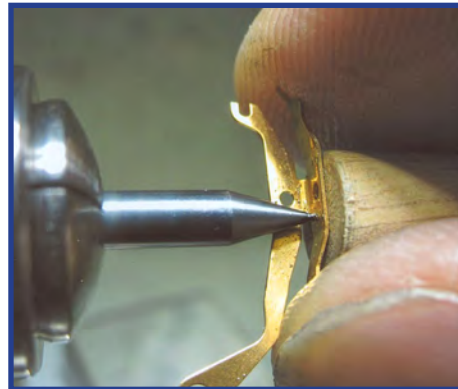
Wooden dowel turned to fit into lathe tailstock and used as drilling pad. The first hole drilled.
